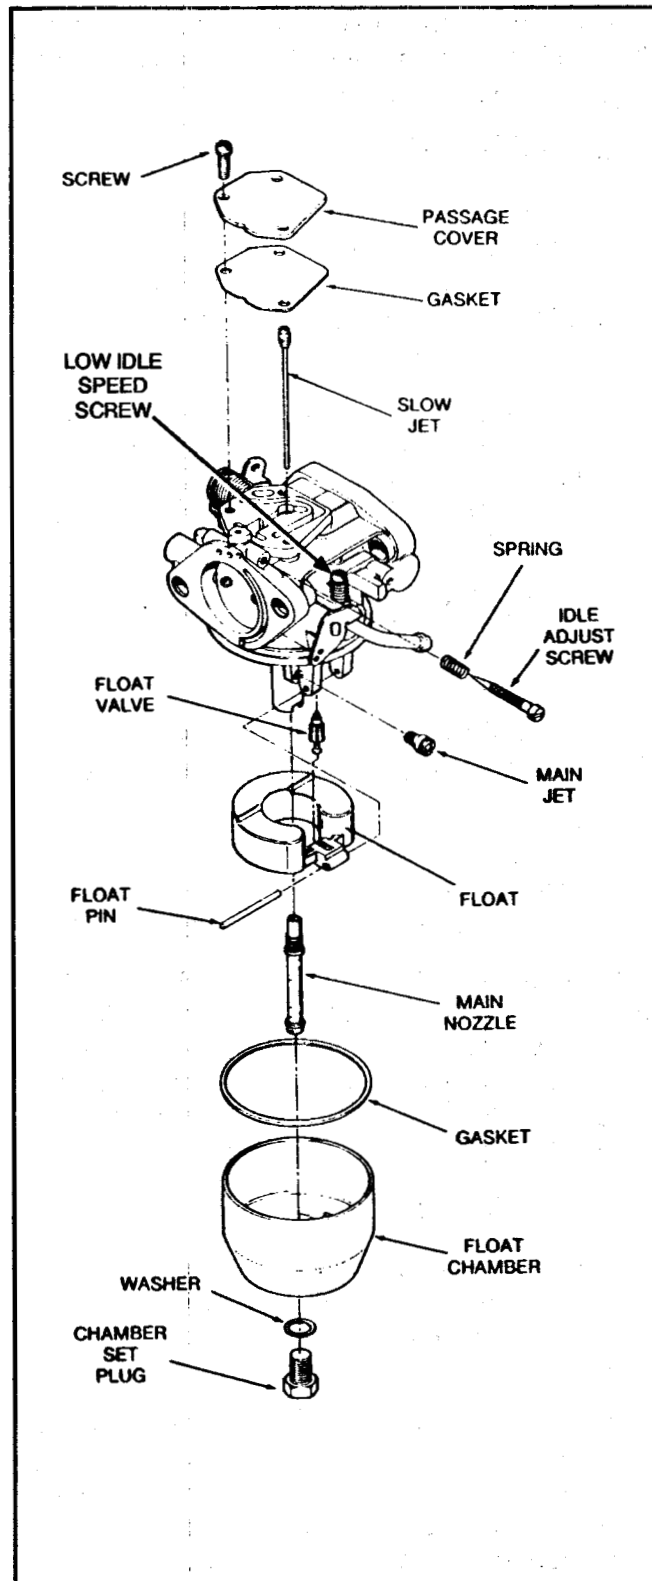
GASOLINE CARBURETOR (SPECS A AND B)
